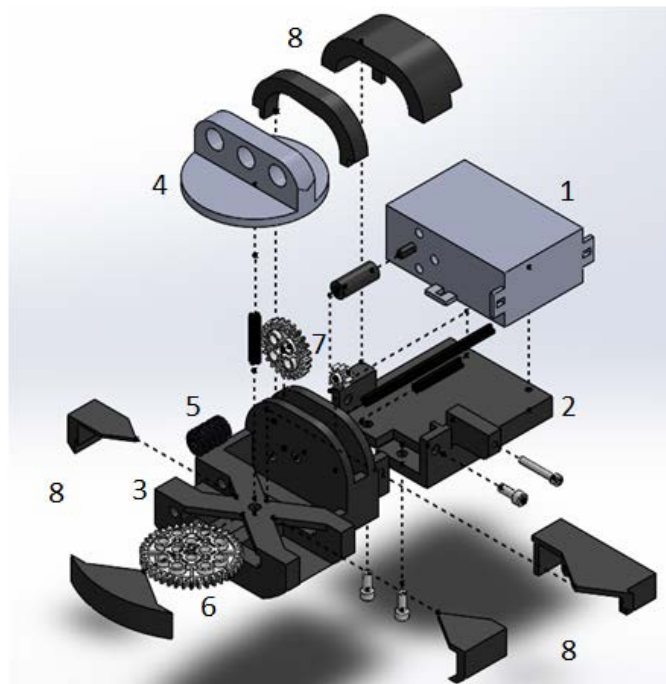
Exploded view of the sample positioning platform. Components are labeled in Table 2.1.
